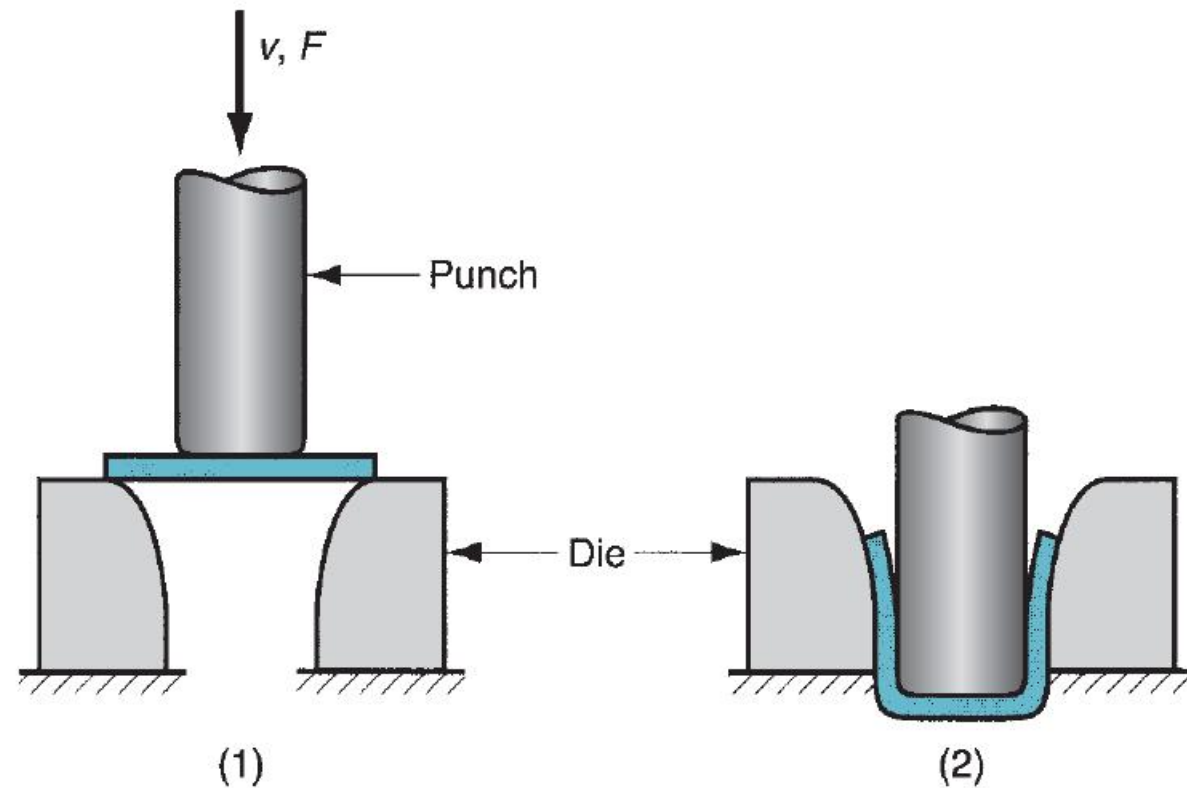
Drawing without a blankholder: (1) start of process, (2) end of stroke.
